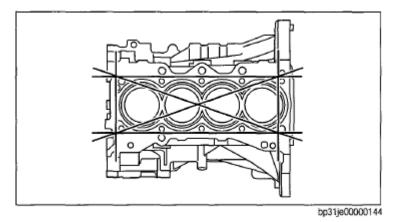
Measuring Cylinder Block For Distortion Using Straight Edge And Feeler Gauge
